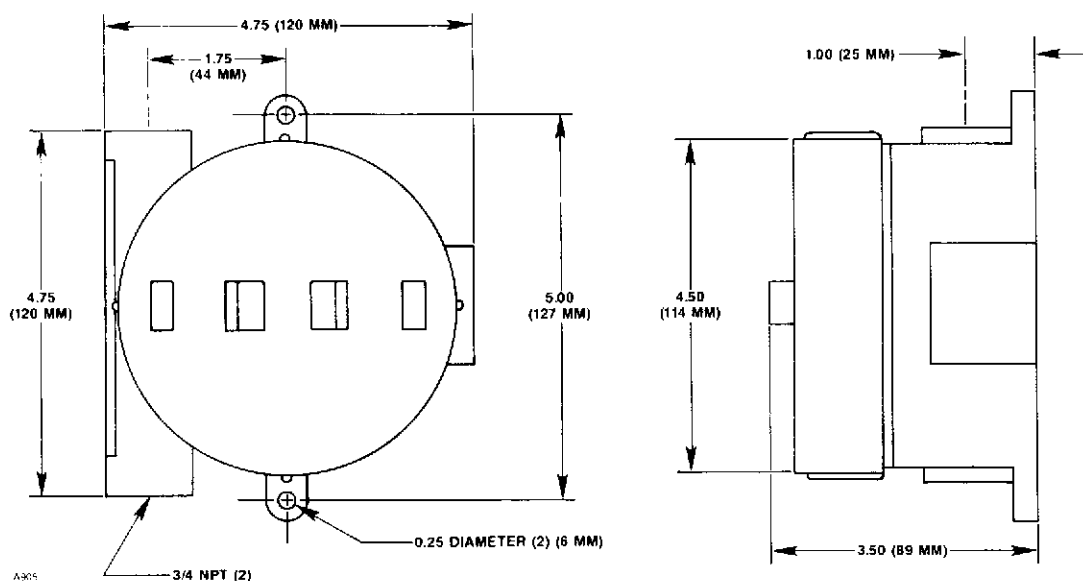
Junction Box Dimensions in Inches (Millimeters)
